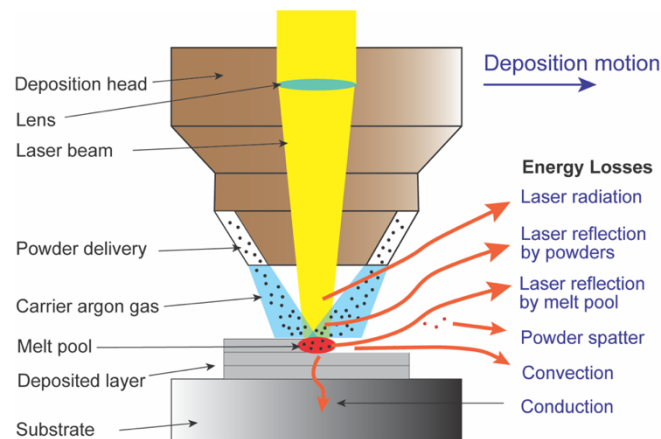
In a laser DED process, a moving laser is used to melt the metal powder which is transported through argon gas to form a desired cross section. It is desirable to control the temperature and dimensions of the meltpool to ensure good bonding between layers and consistent mechanical properties of the resulting part.
